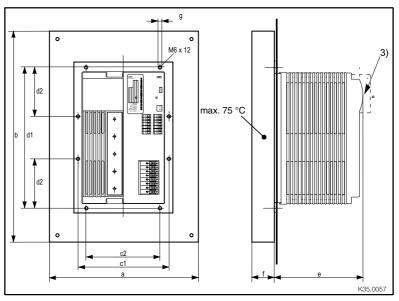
Dimensions 821X-V003: Control-cabinet assembly of Lenze convection coolers
